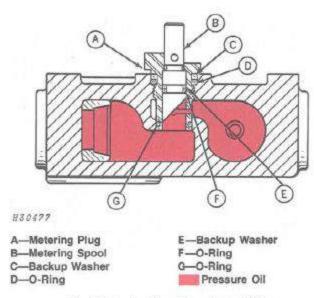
Cross-Section of Flow Control Valve Showing Metering Spool
